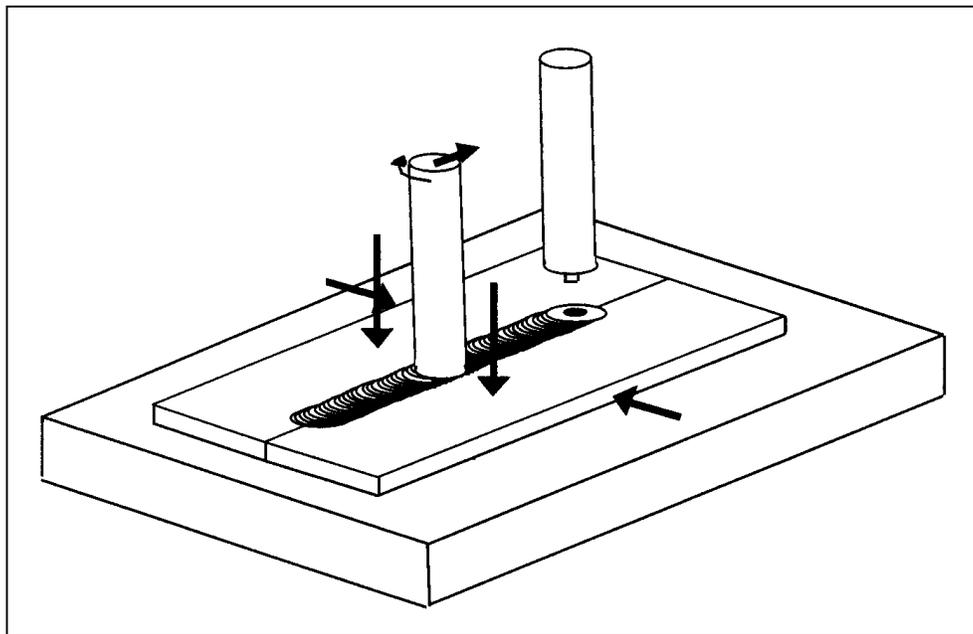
Schematic of Friction Stir Welding Operation
